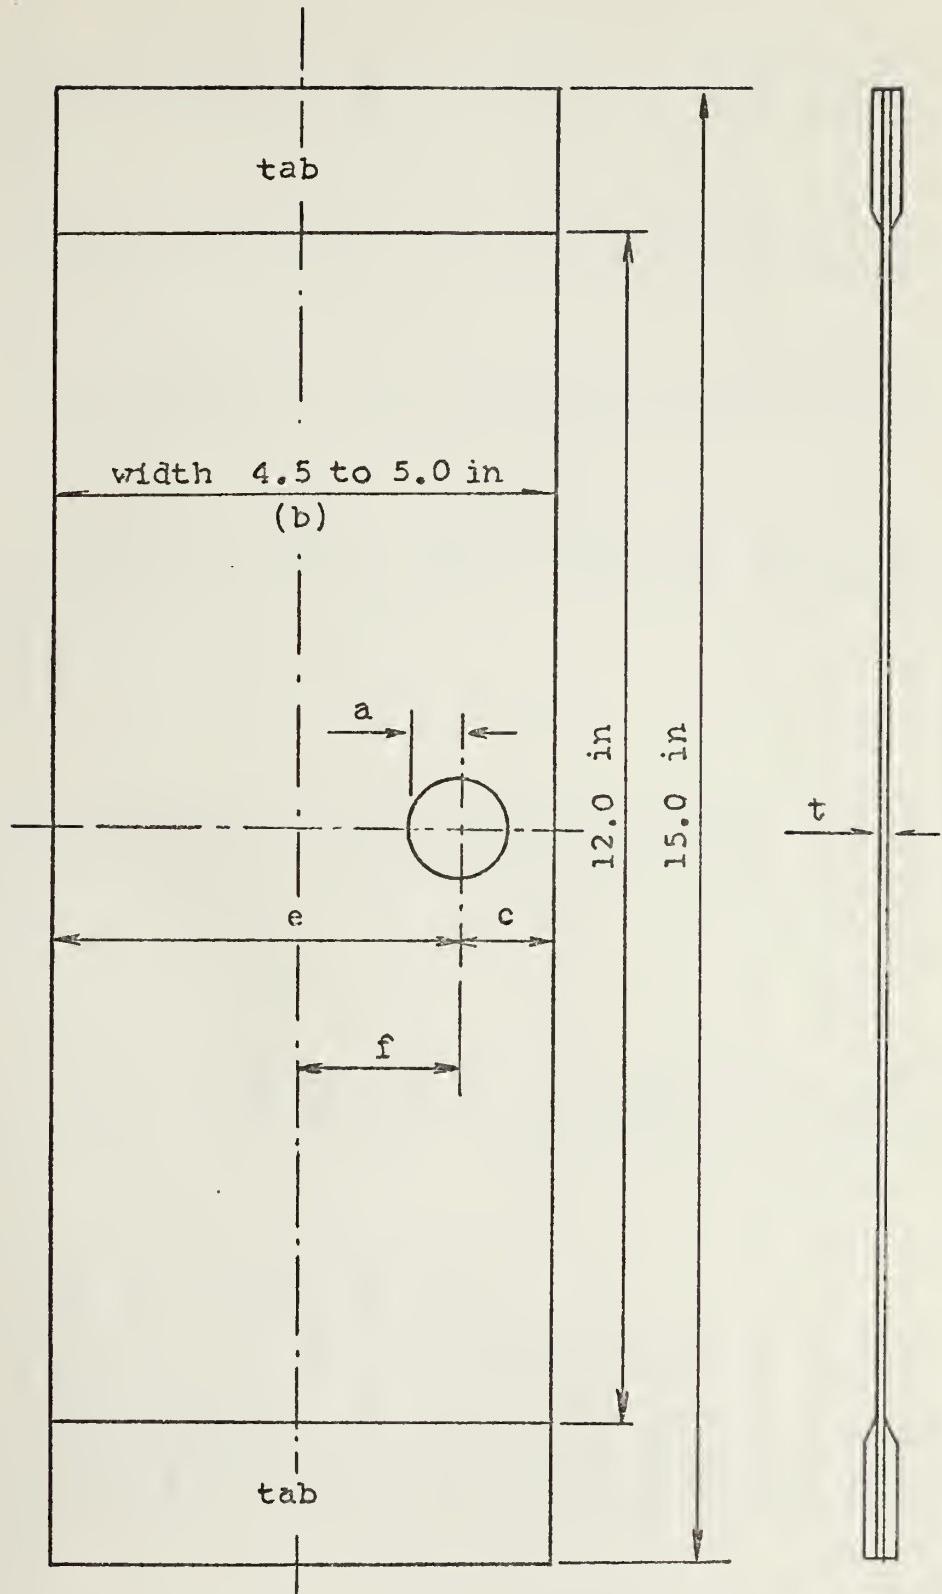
BASIC STRESS CONCENTRATION SPECIMEN DIMENSIONS
